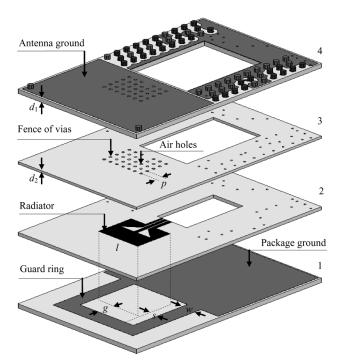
Exploded view and dimensions of the AiP. The outer ring of vias is the fence of vias and the inner rings of vias are air holes.
